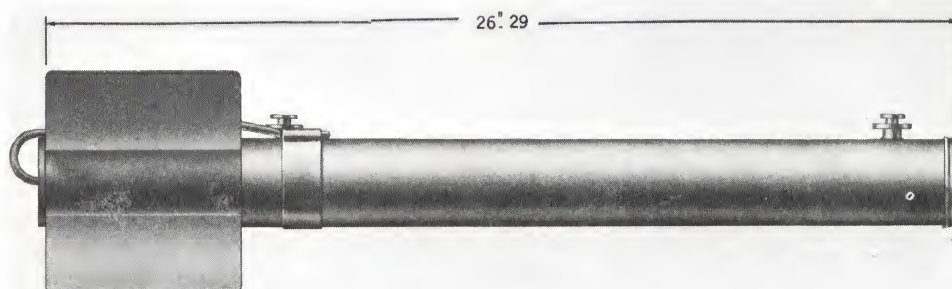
2.25-Inch Rocket Motor Mk 16 Mod 6, External View.
